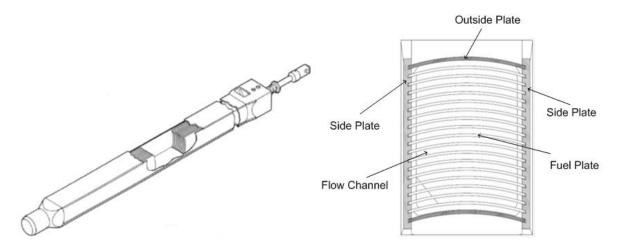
Cutaway Isometric Drawing and Horizontal Cross Sectional View of Fuel Element.
